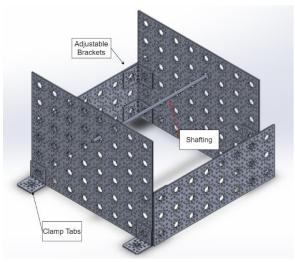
Housing for wind turbine activity gearbox, without input and output shafts shown.
